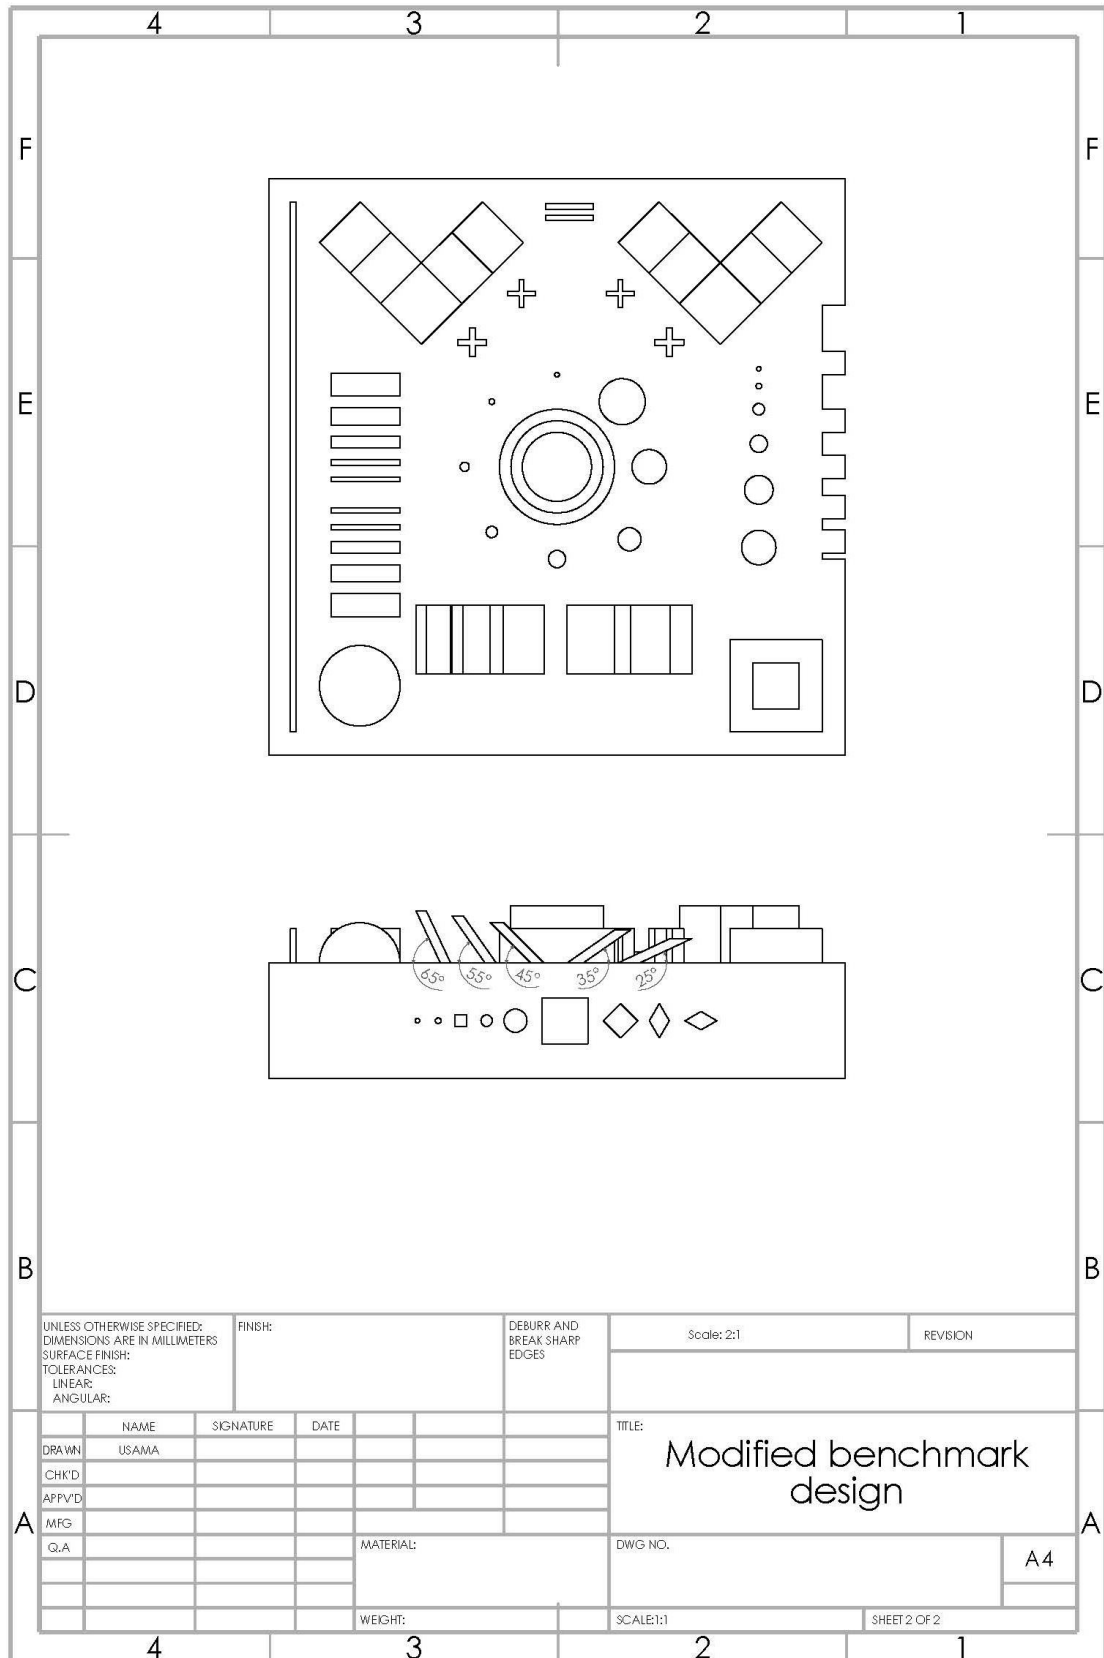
Dimensional drawing of benchmark artifact used for the decision-making process.
